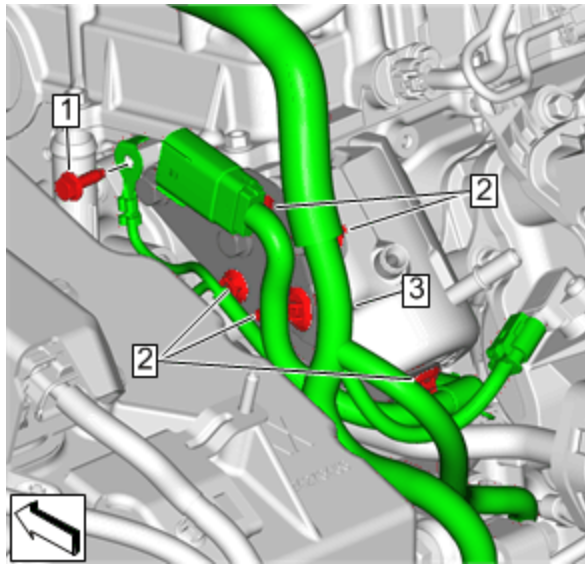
Engine Wiring Harness Ground Bolt And Harness Clips
